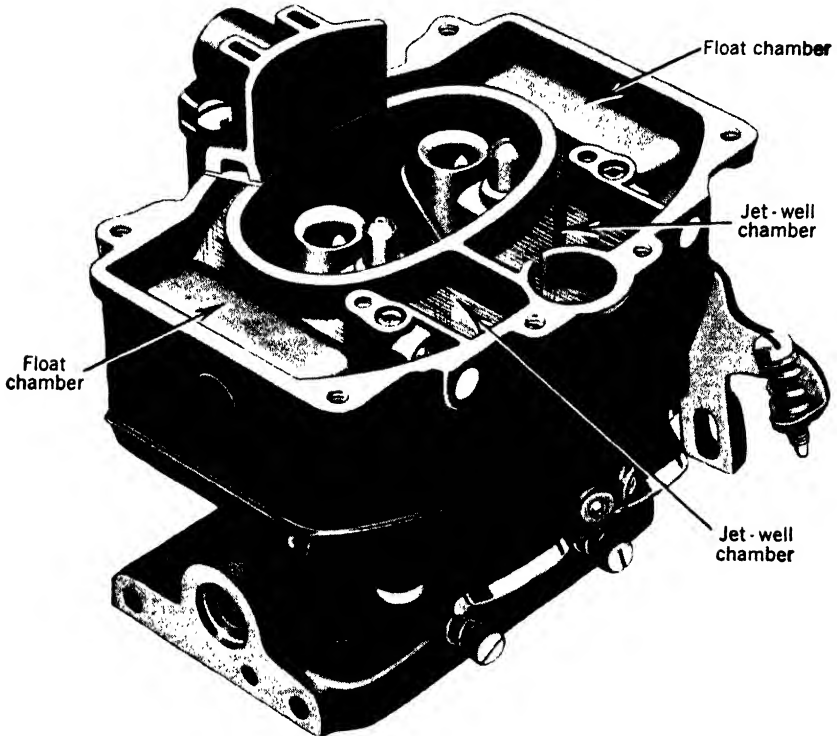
Open view of lower half of Stromberg Aerotype duplex downdraft carburetor, showing two float chambers and two jet chambers.
